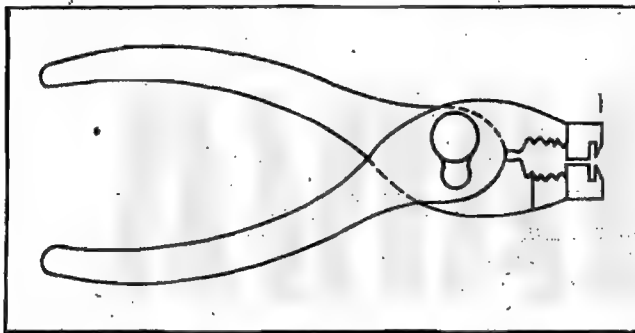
Special Pliers Used to Install Washer on Ignition Cable
